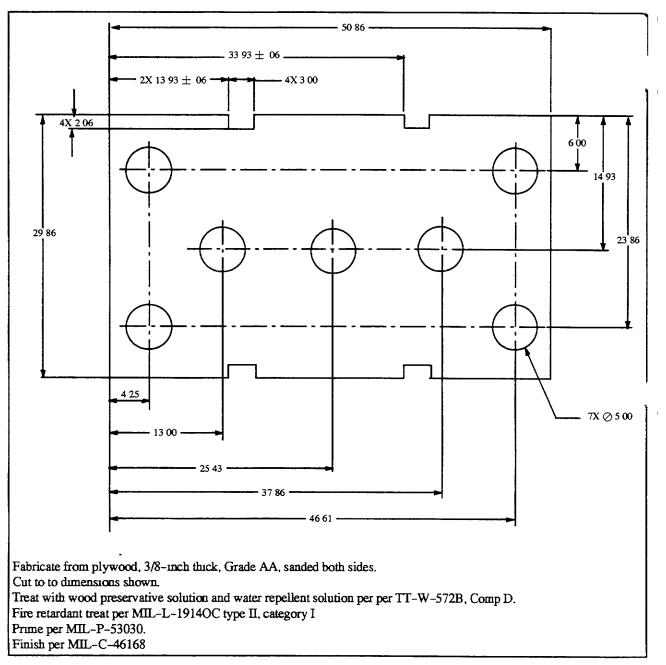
Deflector Assembly Storage Box Shelf, Upper
